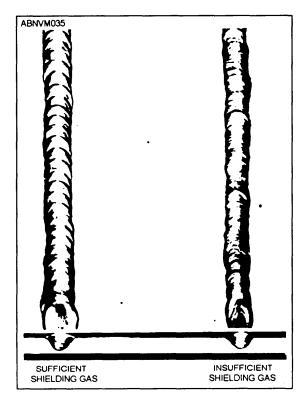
Comparative GTA weld beads as determined by shielding gas.
